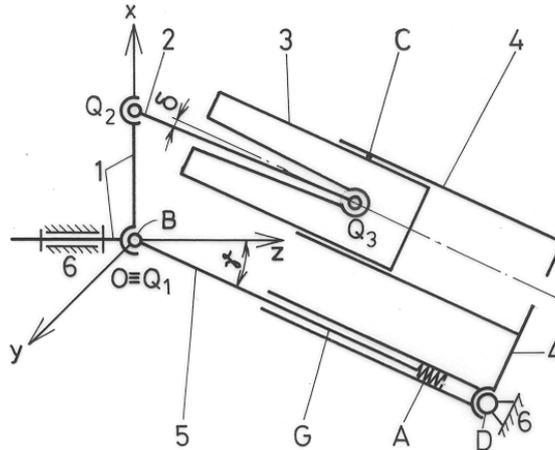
Structural scheme of the mechanism with a piston, belonging to a pump with axial pistons, with the motion transmitting by connecting rods: 1 – shaft and driving flange/crank; 2 – connecting rod; 3 – piston; 4 – cylinder/cylinder block; 5 – guiding axle; 6 – fixed element; $O \equiv Q_1$ – rotating centre of the driving flange; Q_2 – joint between the connecting rod and the driving flange; Q_3 – joint between the connecting rod and the piston; C – piston in the cylinder; D – ensemble of spherical surfaces of the cylinder block and distributing plate; A – arch of pressing of the cylinder block on the distributing plate; G – guide of the cylinder block; B – joint between the driving flange and the guiding axle.
